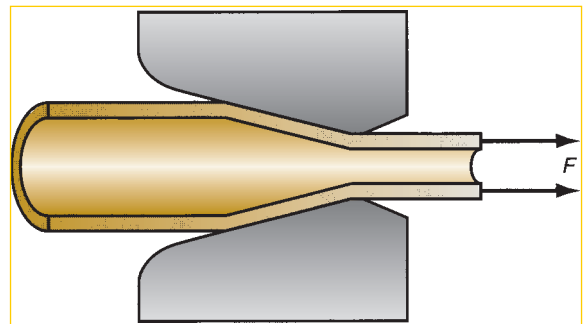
Tube drawing with no mandrel (tube sinking).
